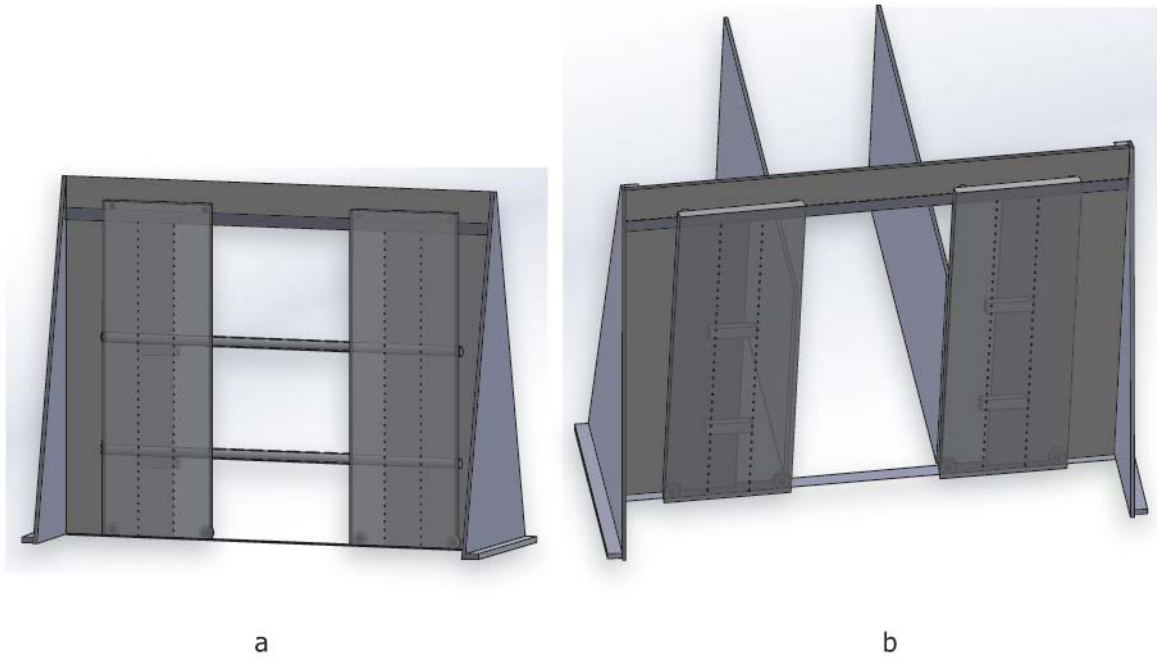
Confined Pass-Through: Horizontal Movement Artifact (a) Wall and (b) Aisle
